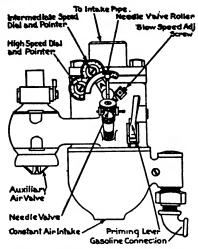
THE CARBURETOR AND ADJUSTING PARTS
